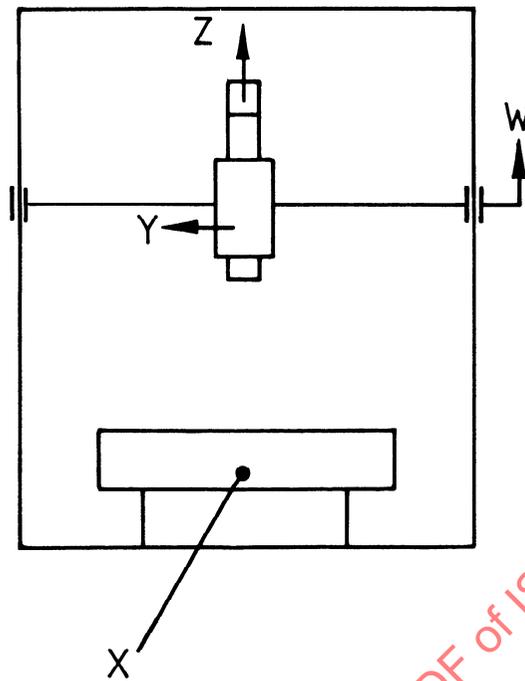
Type 3: Machine with one milling head on the cross-rail
